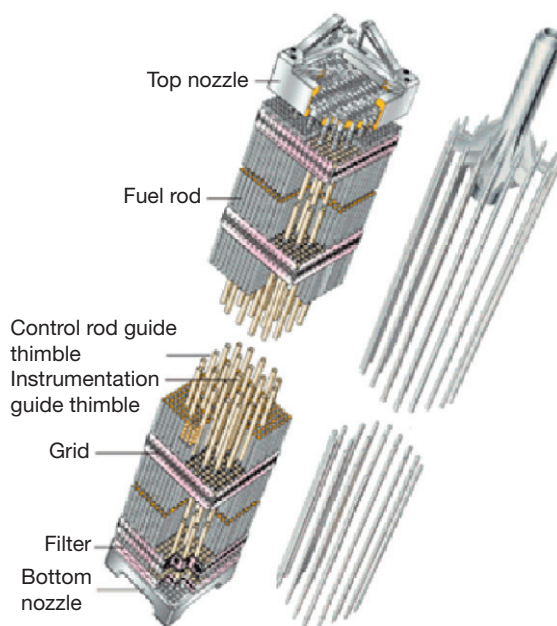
Example pressurized water reactor fuel assembly design of the $17 \times 17 - 24$ type with a fuel assembly averaged U enrichment of 3.9%. Reproduced from <http://www.mhi.co.jp/en/index.html>.
